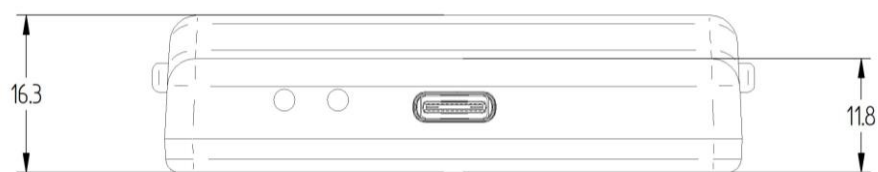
skID R1280I Technical Drawings – Bottom panel view
